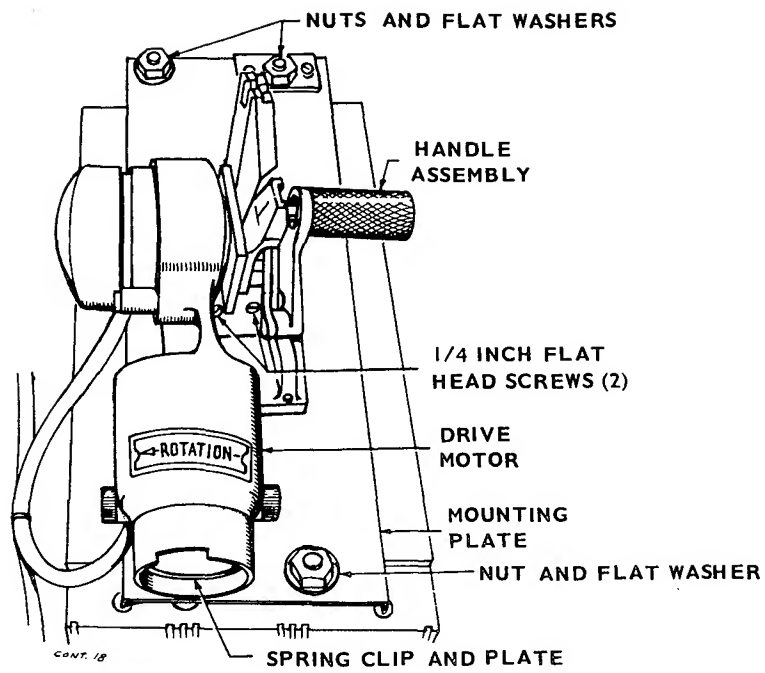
WESTINGHOUSE 800 AMPERE TRANSFER SWITCH
